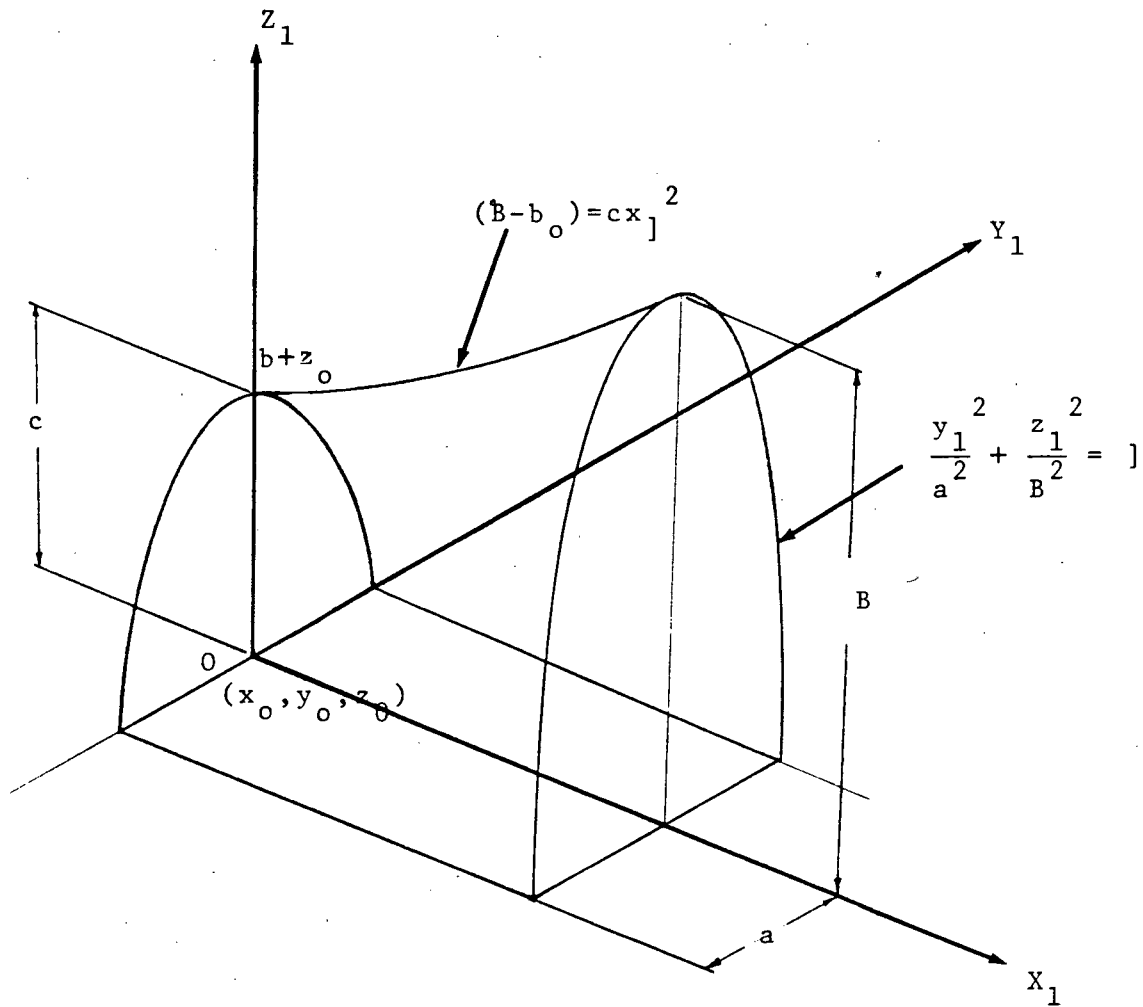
Principal sections adopted for vacuum cleaner housing mould
